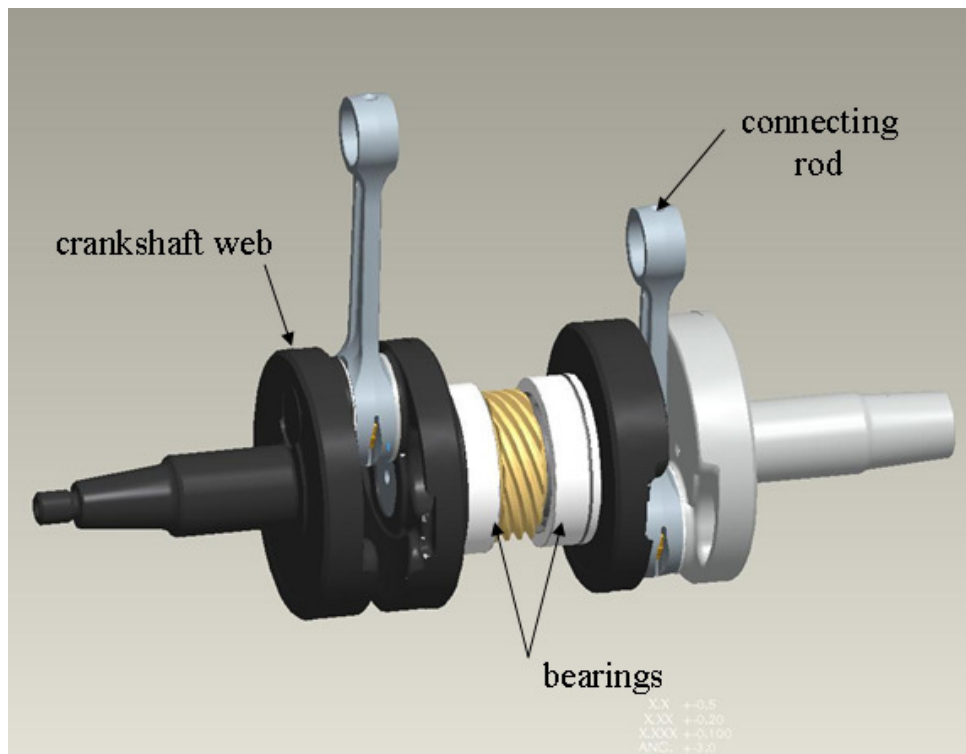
An assembled multi-piece crankshaft for a twin cylinder engine.
